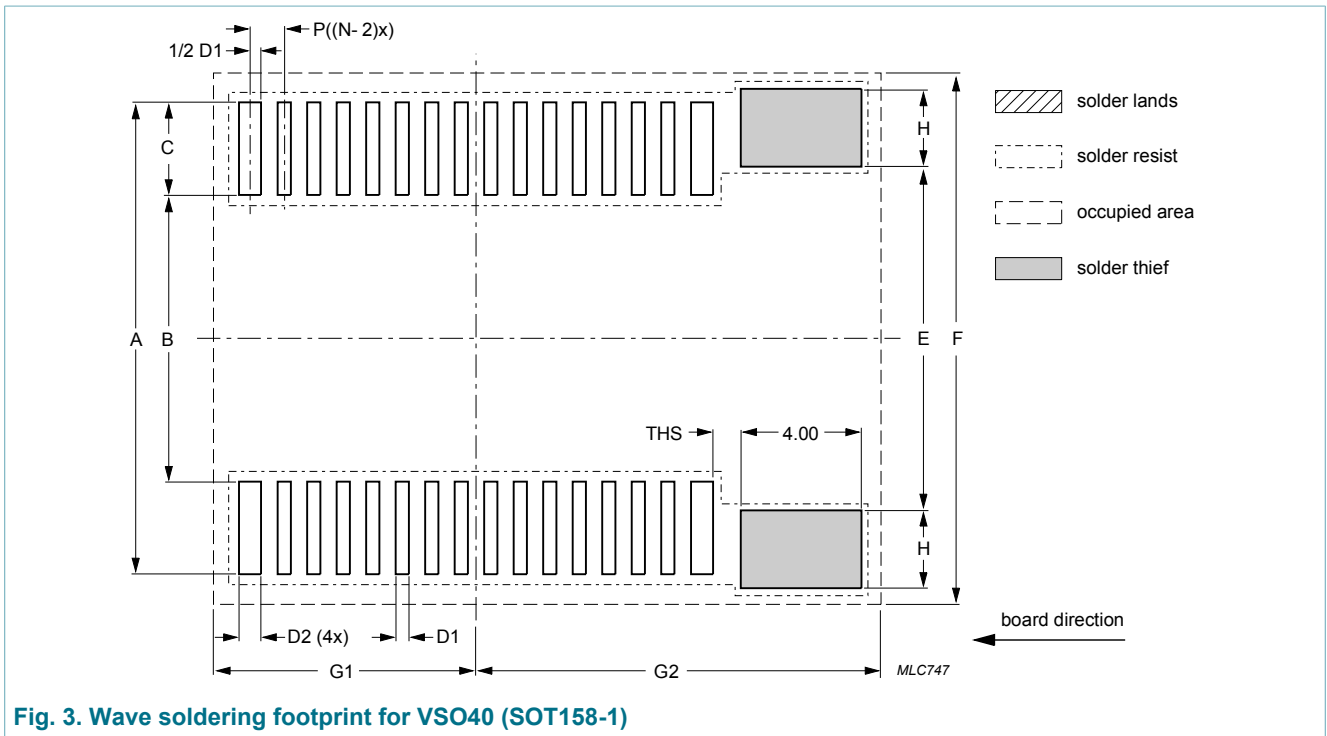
Wave soldering footprint for VSO40 (SOT158-1)
